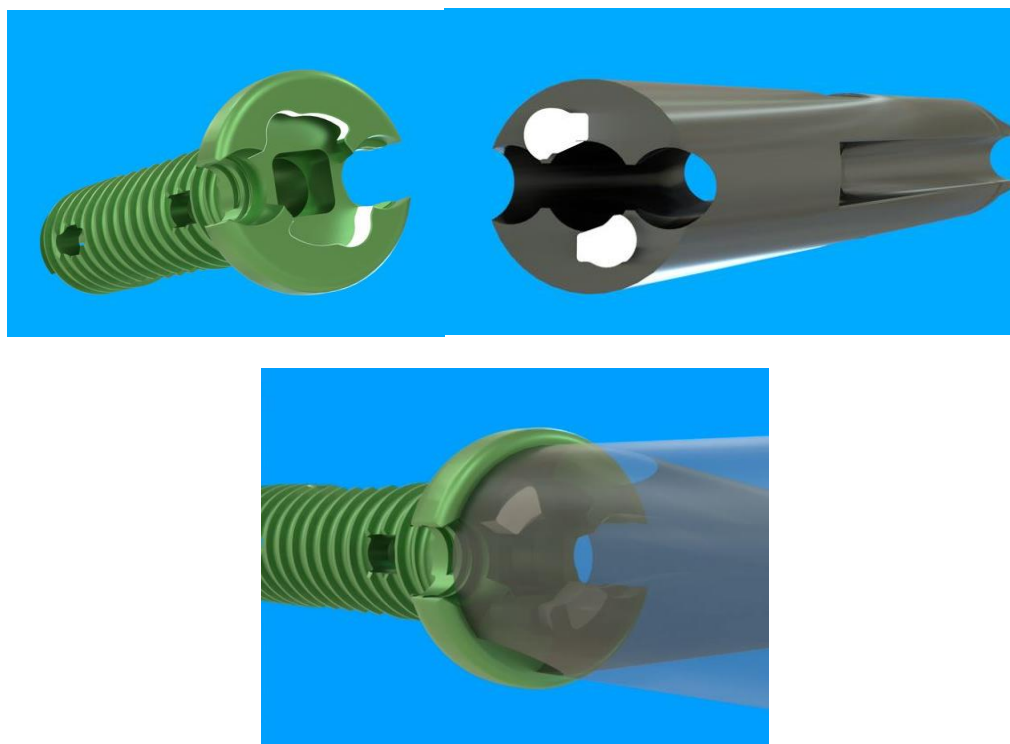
Image of Introducer Sleeve assembled with Trident Ø13 mm Main Screw
